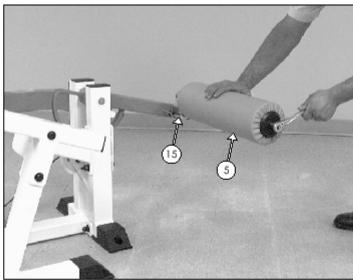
Next, attach the Foam Roll 2 X 5 1/2 X 18 (#5) to the Swivel Foam Roll Tube (#15) using one Hex Head Cap Screw 3/8-16 X 1 1/2 (#55).
